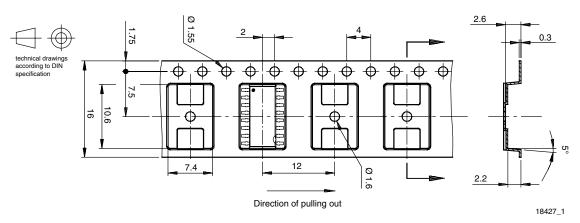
TTape and Reel Packing for TCMT460XT0 (2000 parts per reel)
